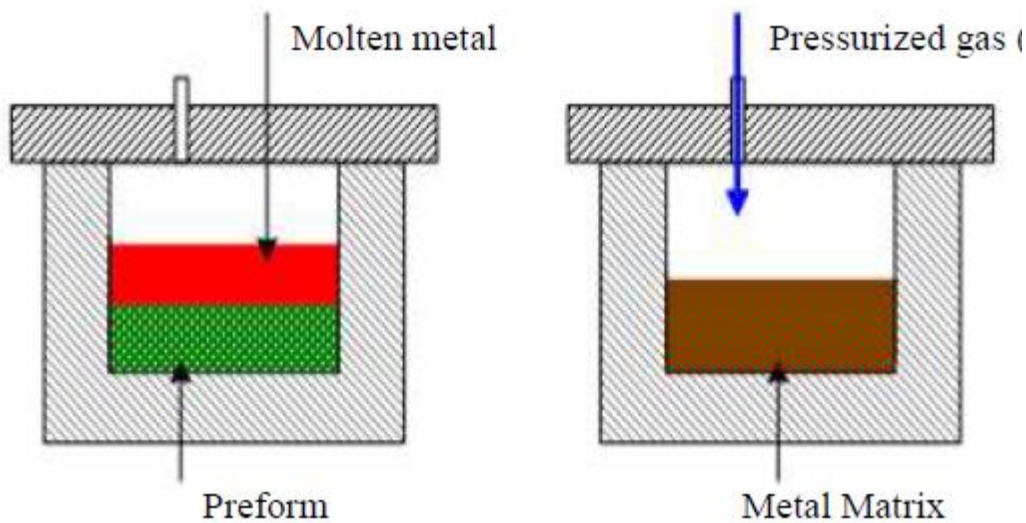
Schematic drawing of Gas Pressure infiltration Casting after [26].
